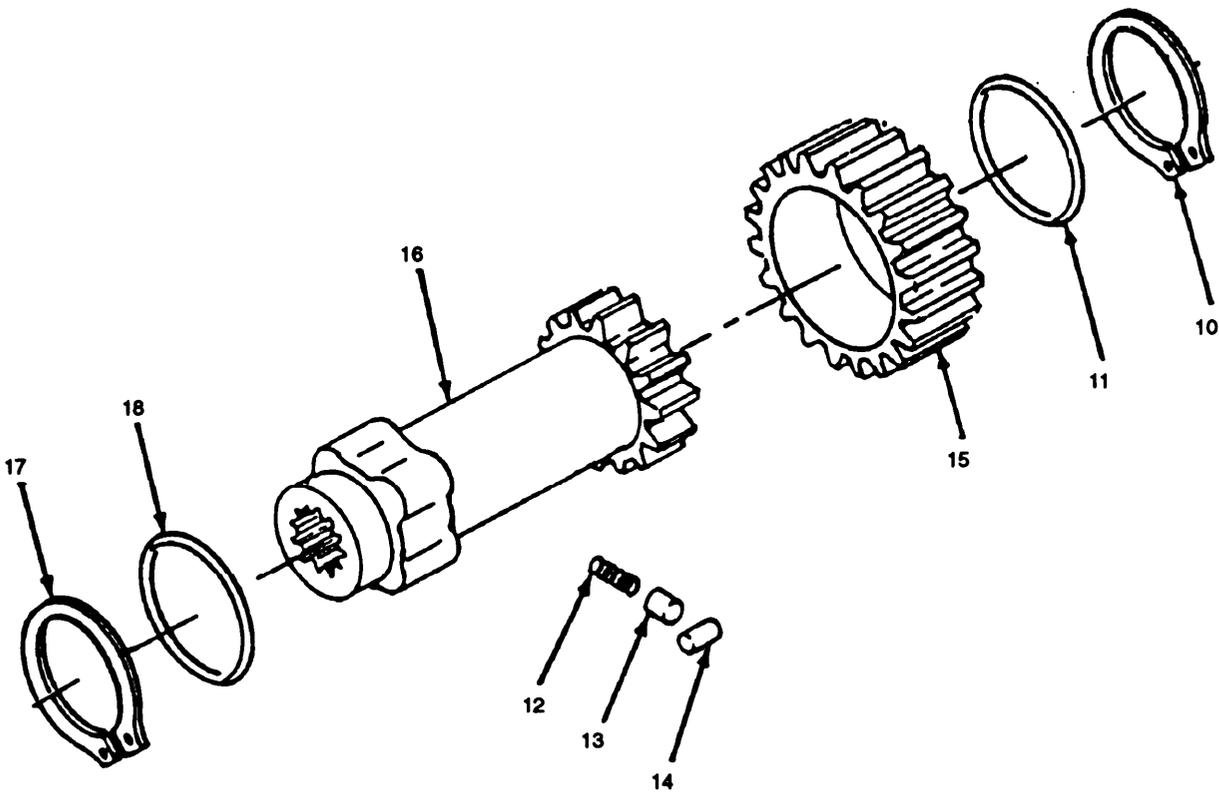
Winch Assembly Model PG-115-043R, Reassembly (Sheet 5 of 7).
